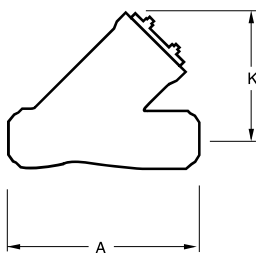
H-7-WE* Butt Weld Ends
